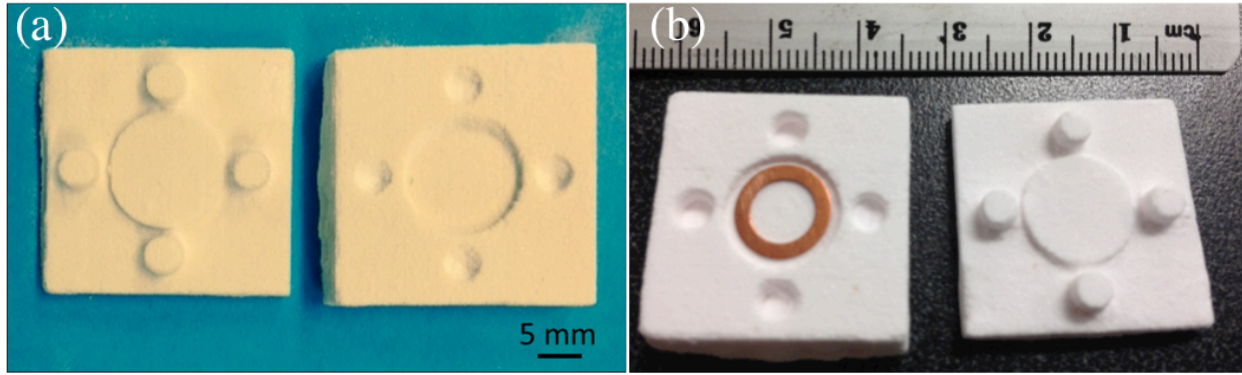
Fabricated male and female parts using alumina (a) before sintering and (b) after sintering at 1680 °C for 4 hours
